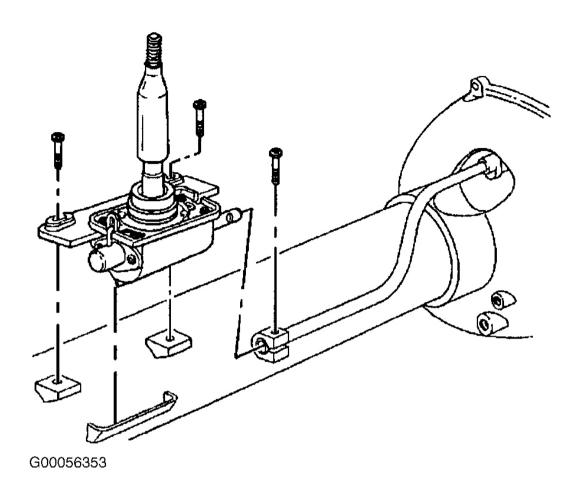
Removing/Installing Shift Control Assembly Courtesy of GENERAL MOTORS CORP.
